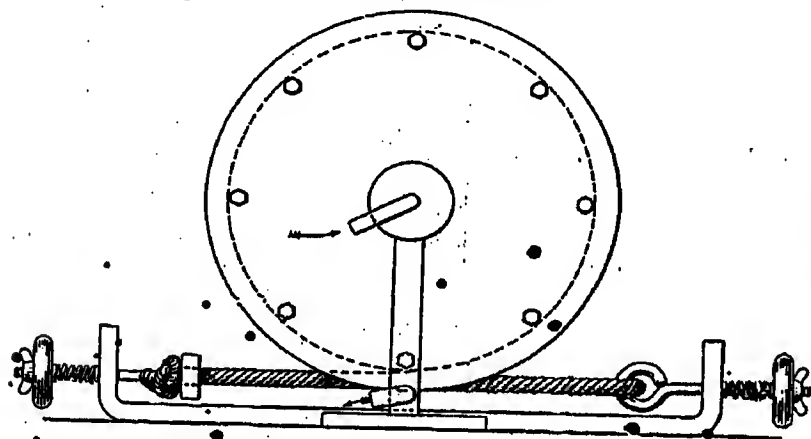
Rope brake gear for testing motor, with improved "dry" water-cooling arrangement.
